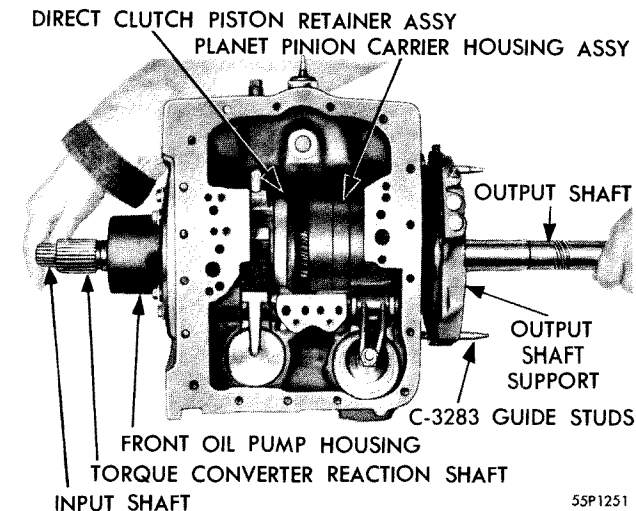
Removing Output Shaft, Carrier Housing and Input Shaft Assemblies
